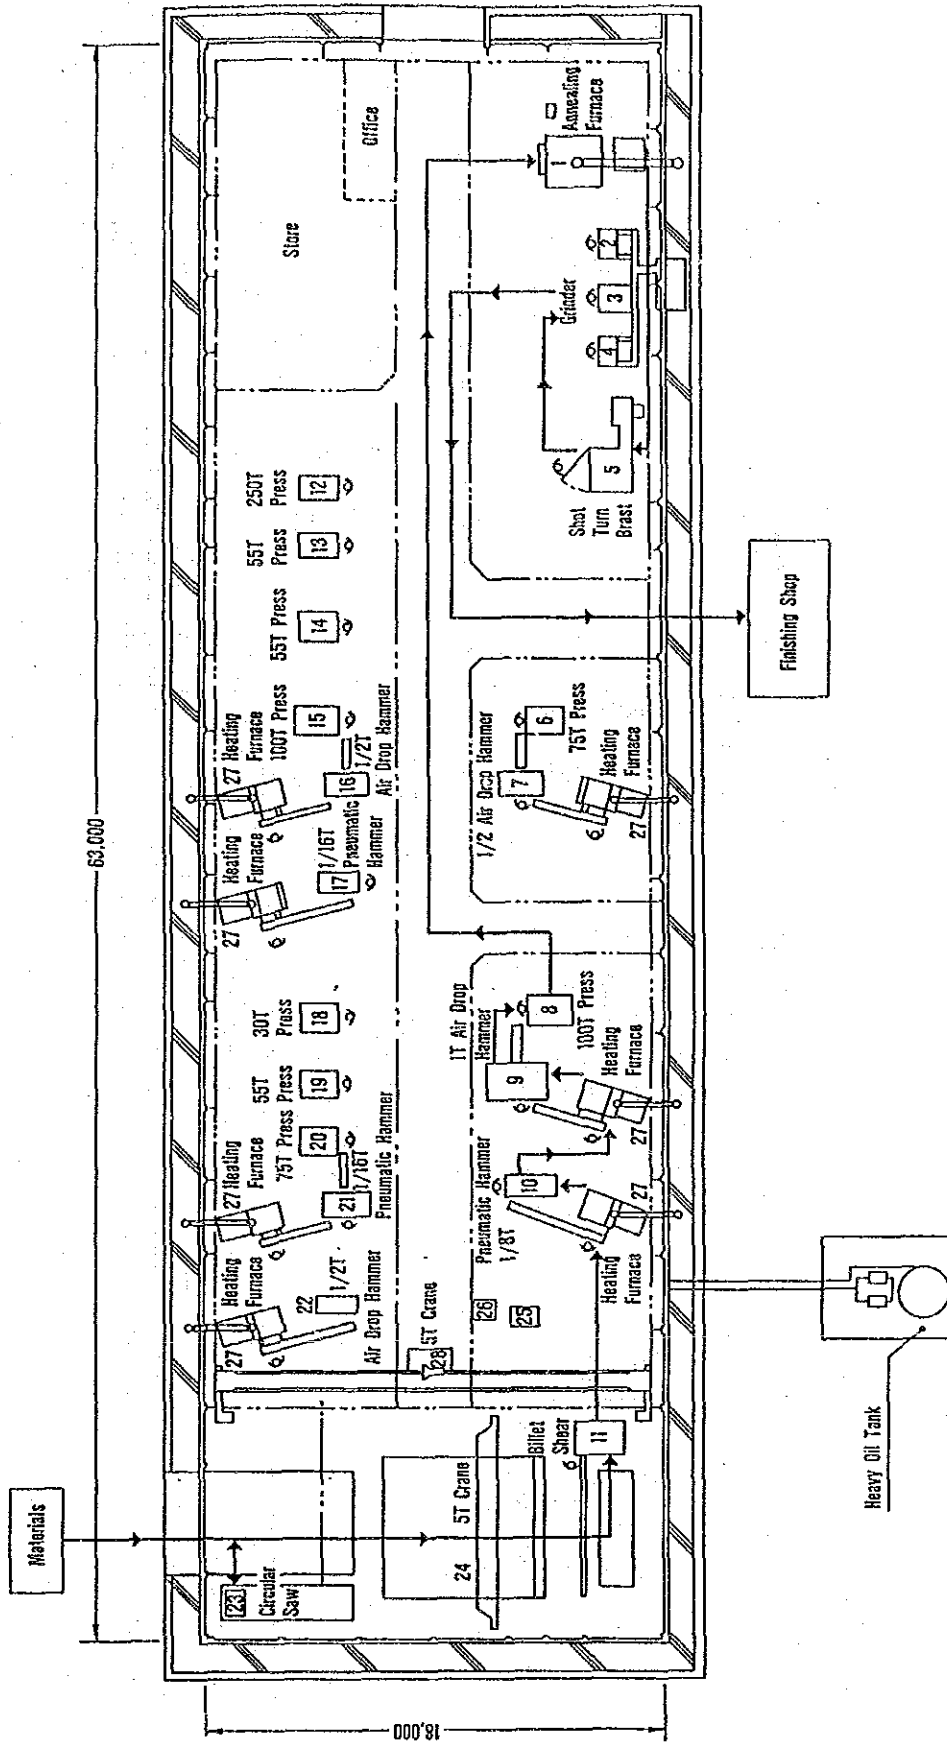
MACHINE LAYOUT PLAN OF MAMOOTIE FORGING SHOP
